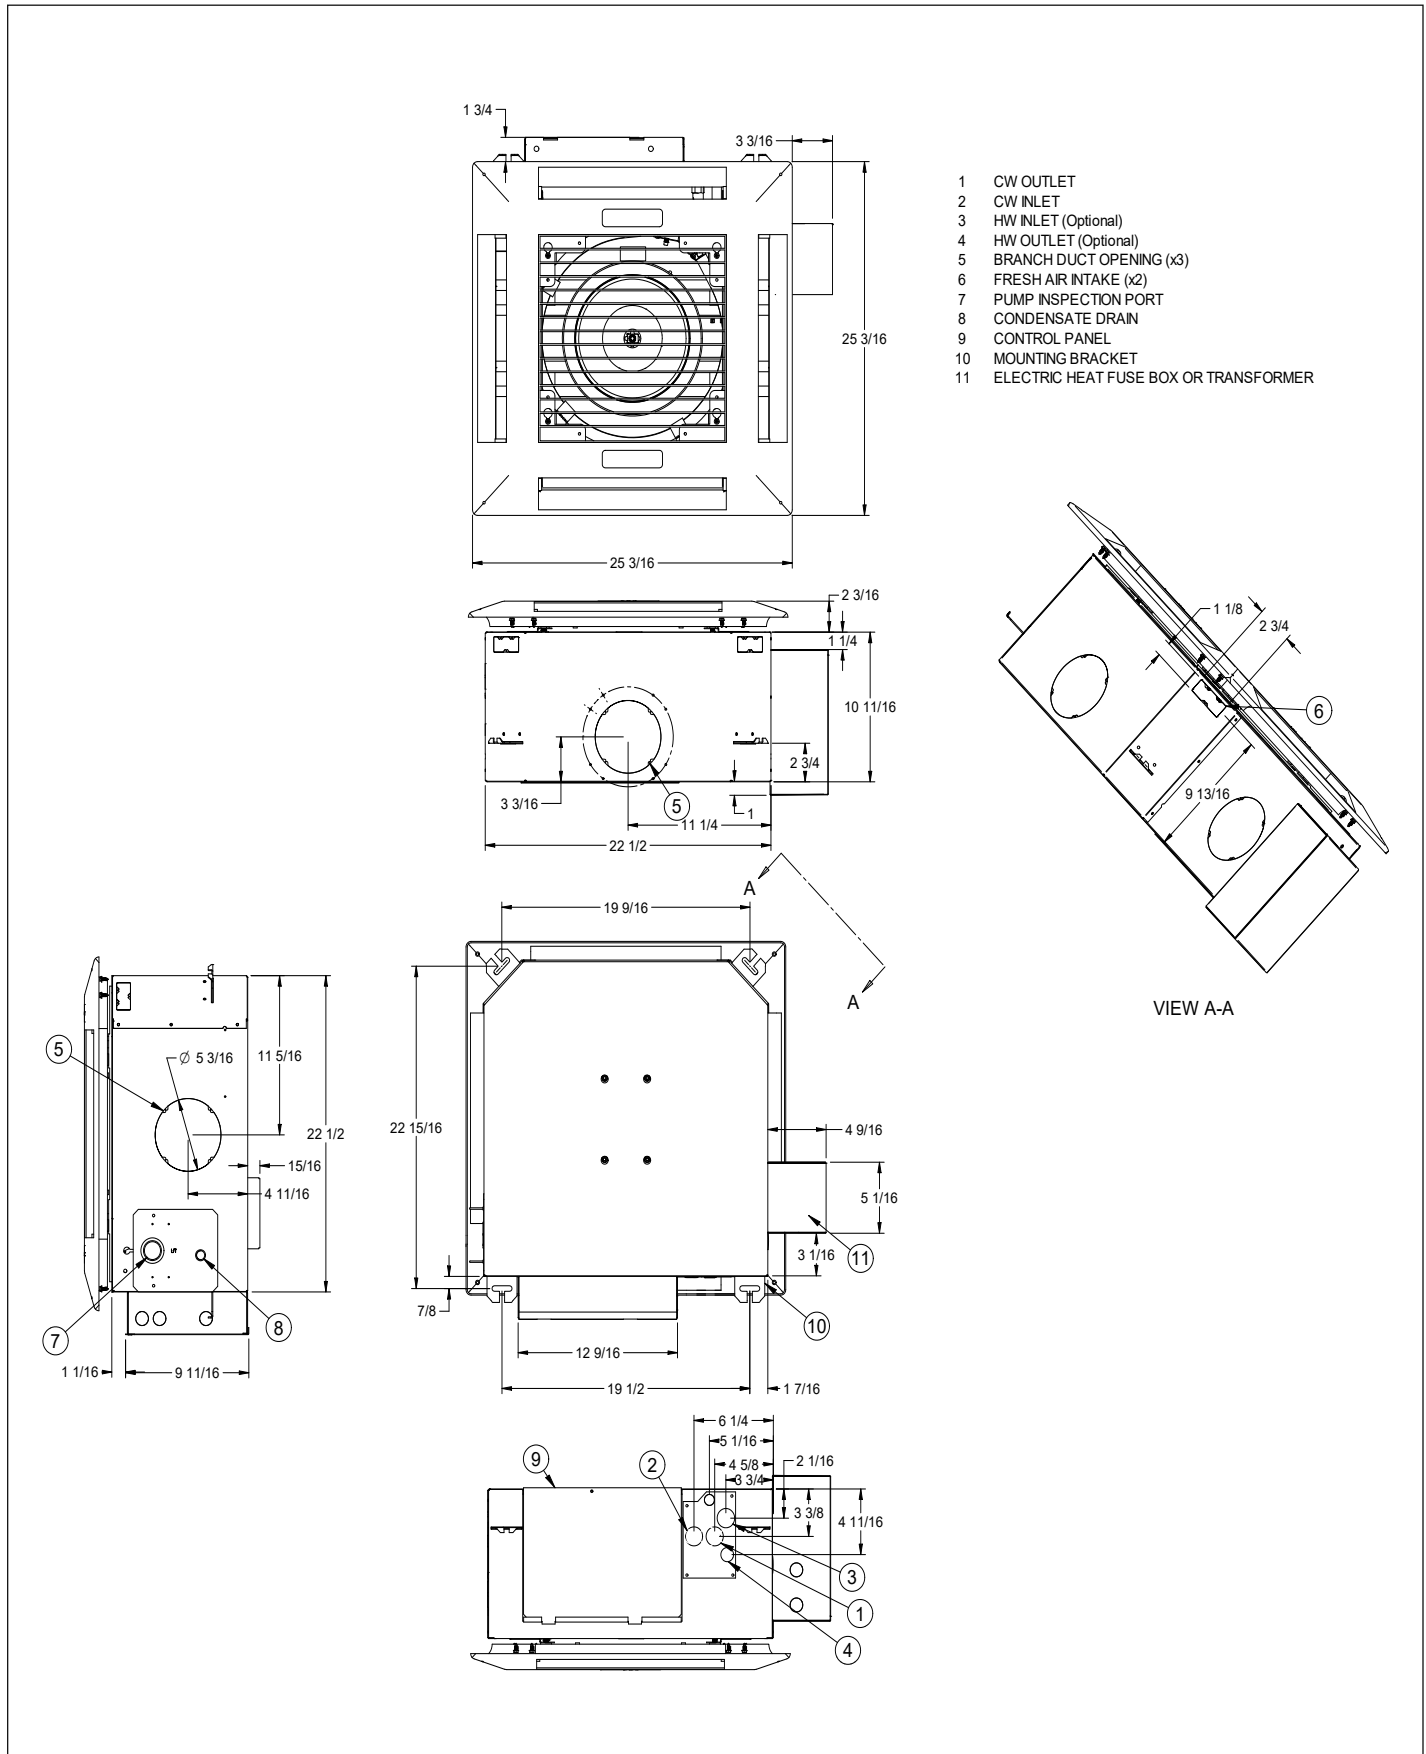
Dimensions - Medium Chassis: CCW18 and CCW20 (in inches)
